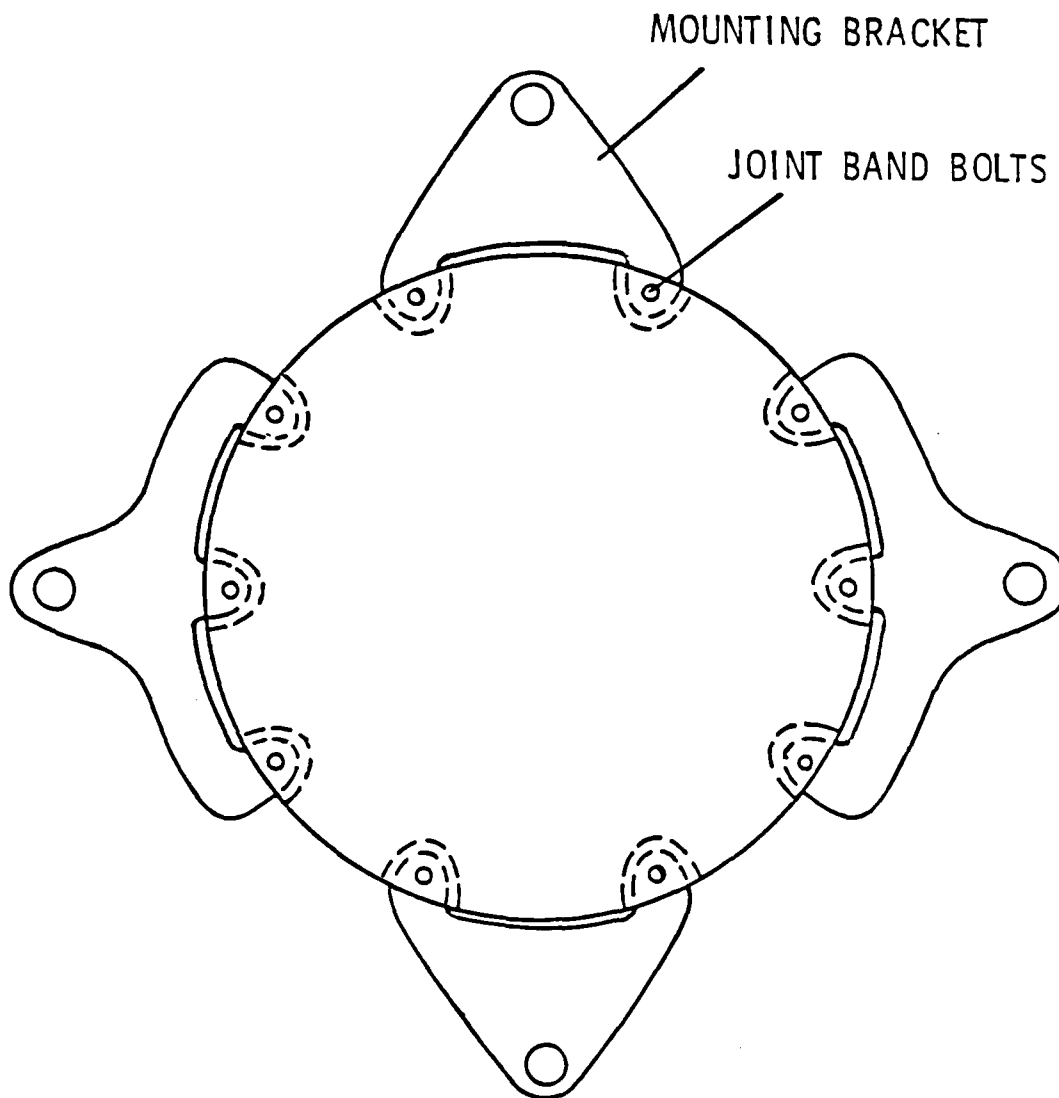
End View of Shell Assembly showing Shell Mounting Brackets Bolted to Joint Bands of Middle Shell Section
